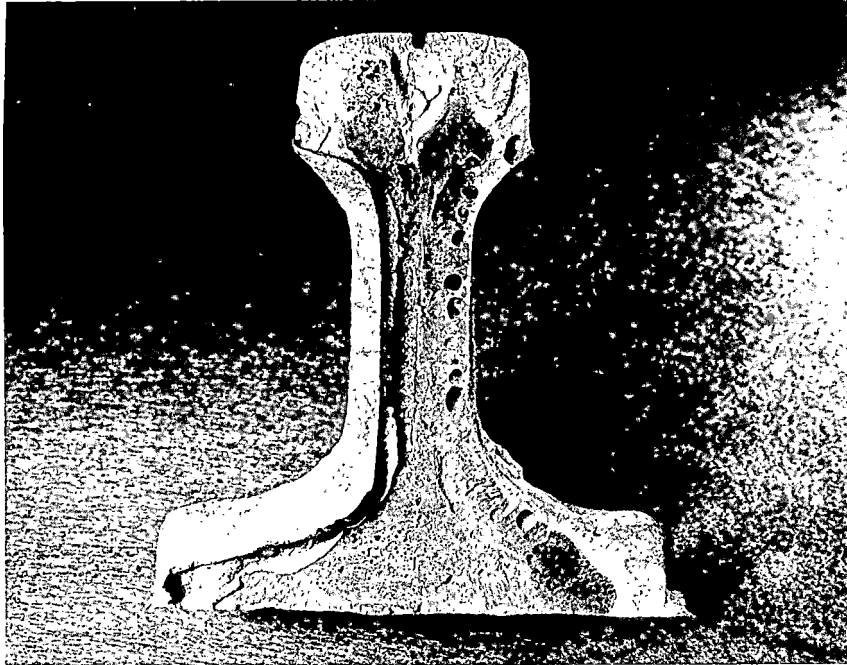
Fracture surface of #3 showing lack of fusion (dark area) throughout the weld zone.
